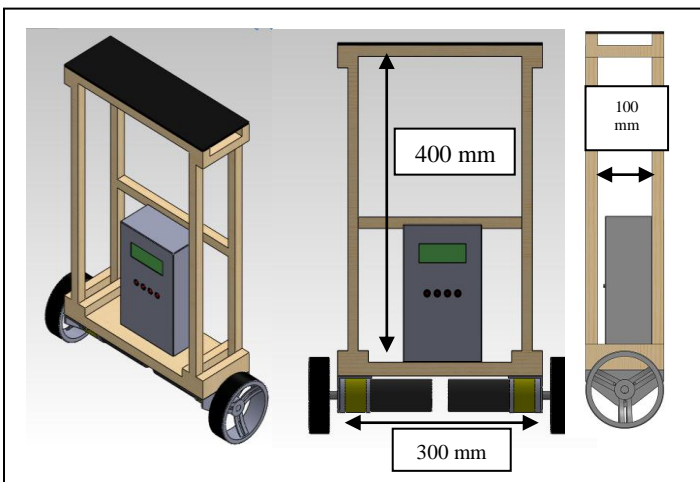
Whole Body Mechanical Design of Two-Wheeled Self-Balancing Robot
